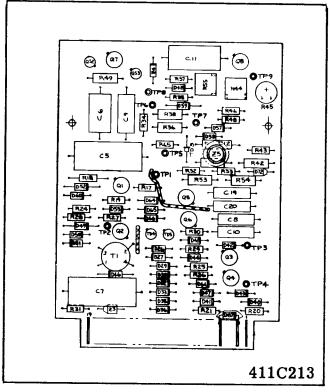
Printed Circuit Board Assembly for SDG Relay
